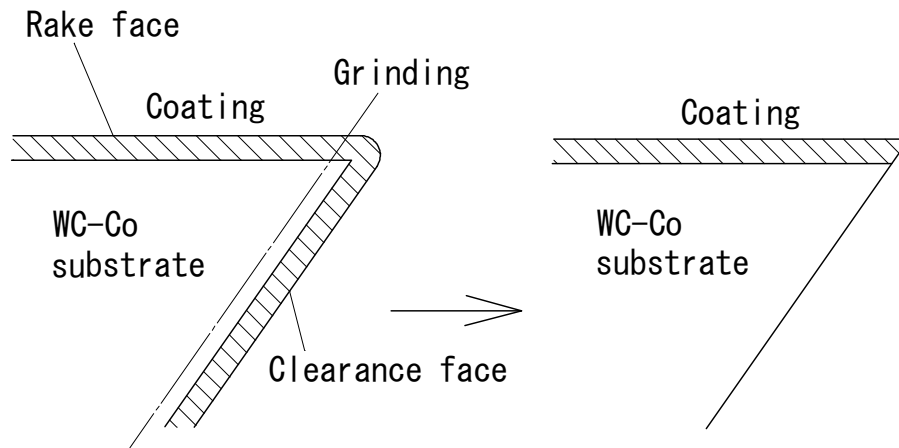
Schematic cross-sectional drawings of the coated carbide insert for the cutting test. After the coating process, the coating on the clearance face was removed by grinding to create a sharp cutting edge.
